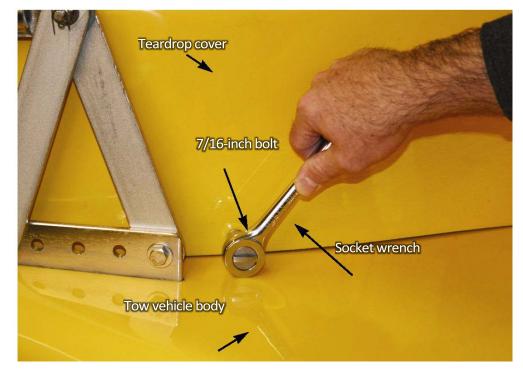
Removing the 7/16-Inch Bolts Securing the Teardrop Cover to the Tow Vehicle
